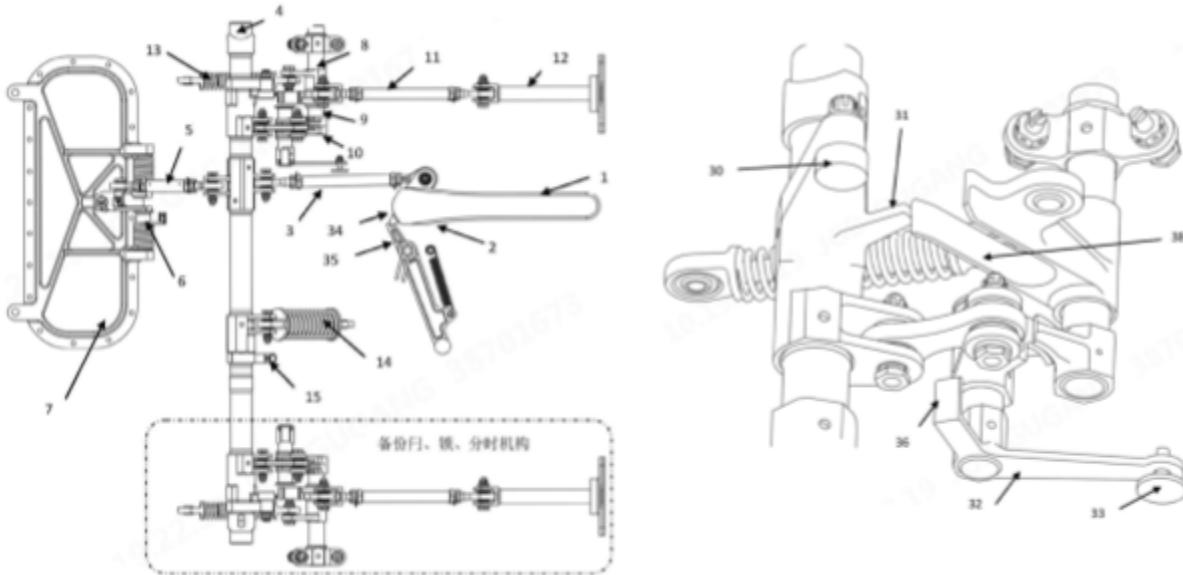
A patent detailing a bolt-type latch mechanism for a pressurized cabin door [11].
